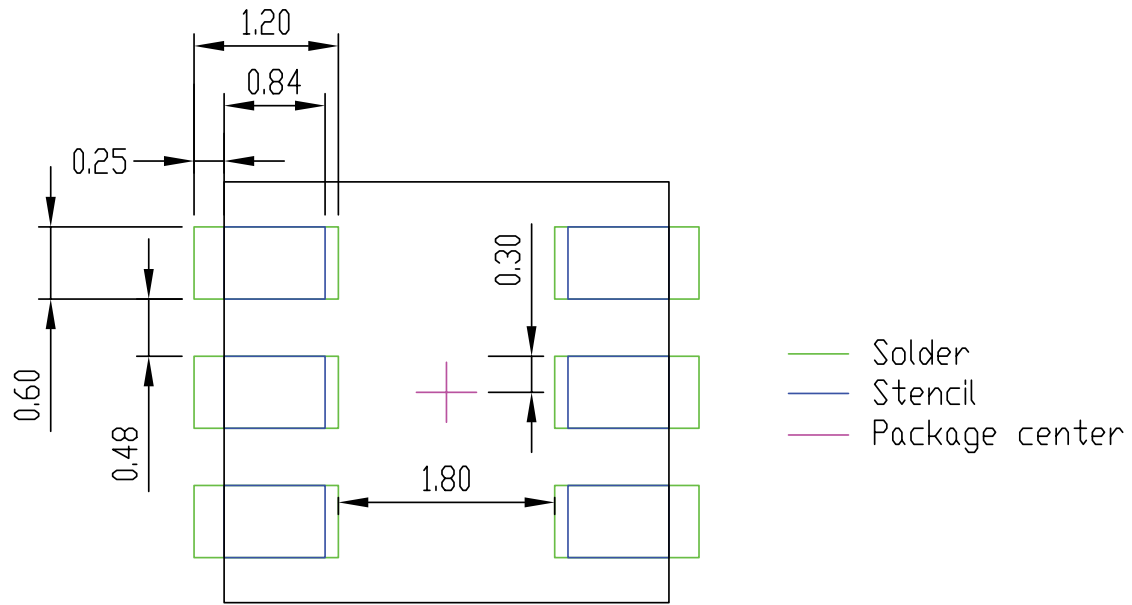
Recommended PCB solder pad layout for LUXEON 3735 RGB.
